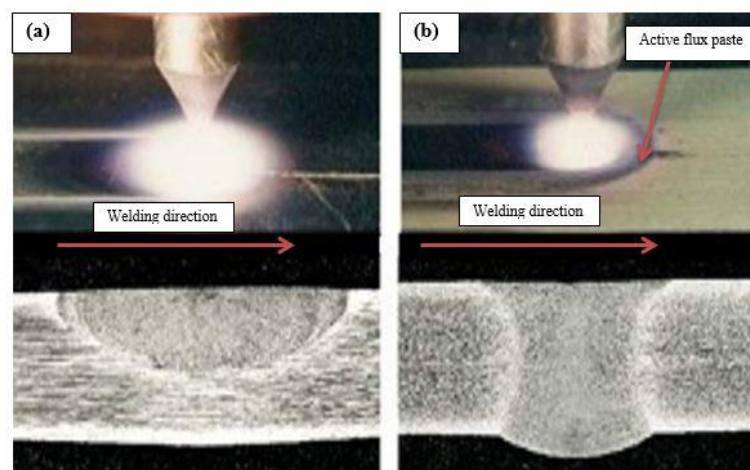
(a) Conventional TIG welding and its bead geometry, (b) activated TIG welding and its bead geometry [5]
